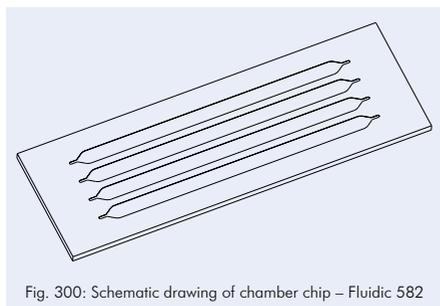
Schematic drawing of chamber chip – Fluidic 582
